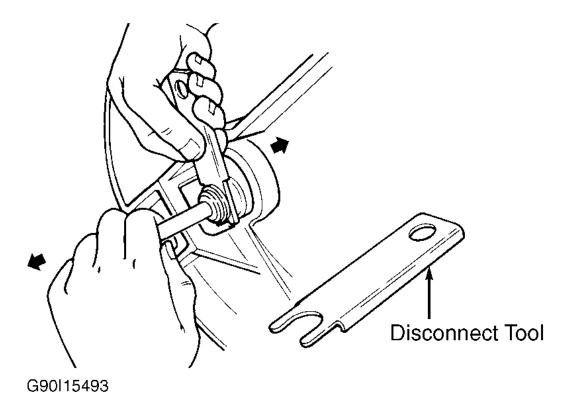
Removing Hydraulic Line (B2300, B2500, B3000 & B4000) Courtesy of MAZDA MOTORS CORP.
